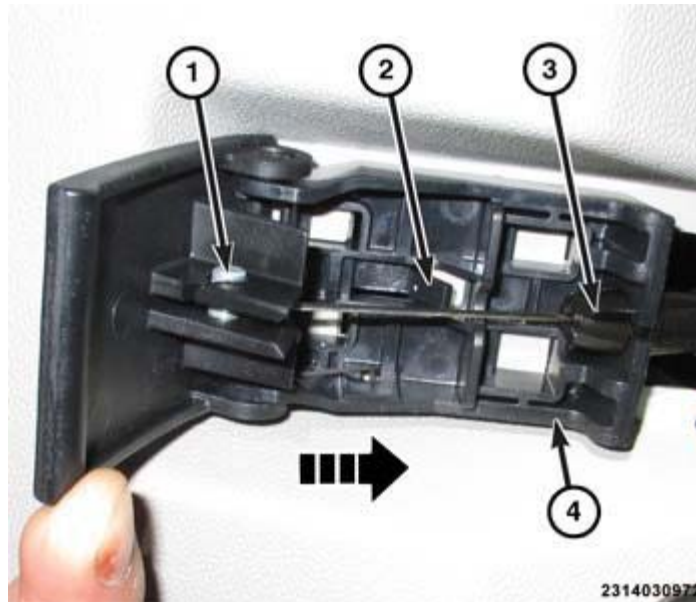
Retaining Tab, Hood Release Cable, Cable End & Handle
